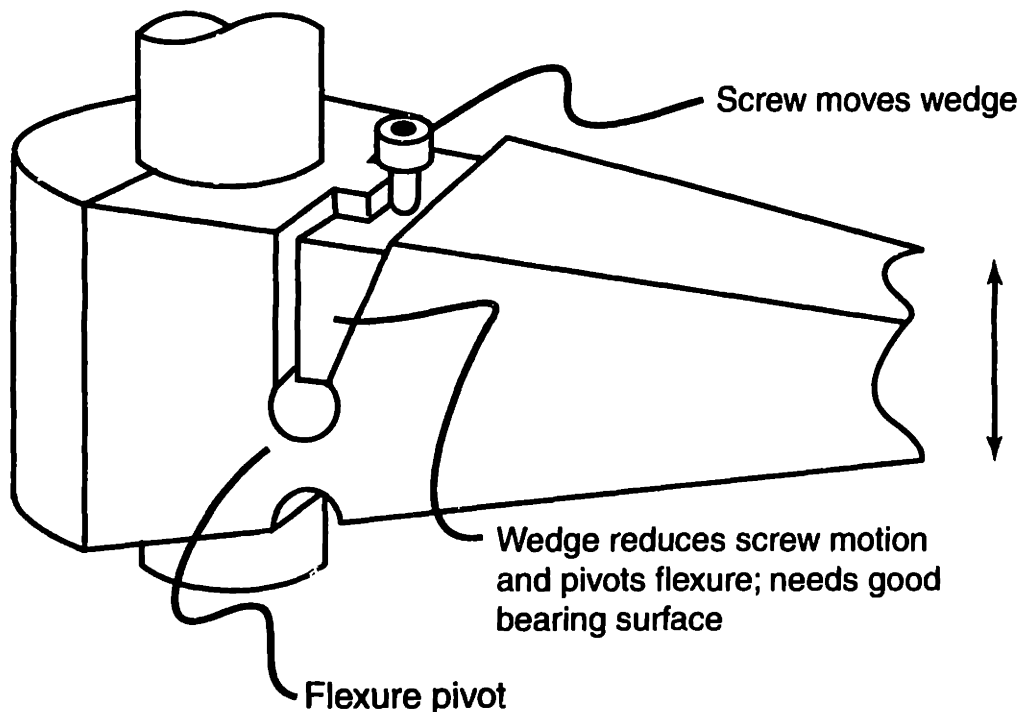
Concept 12 - Single rotary flexure with wedge drive.
